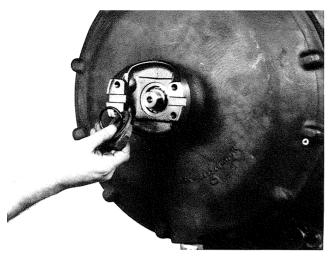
Install input flange "O" ring, washer and nut. Tighten nut to specified torque. (See elastic stop nut torque chart on Figure J).
